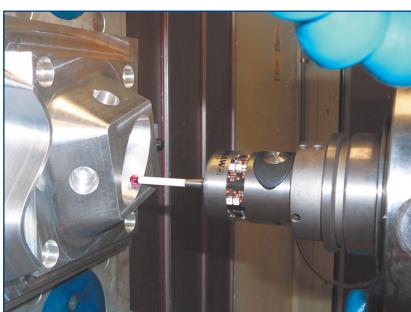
Measurement of conical surfaces machined by five-axis milling technologies.
